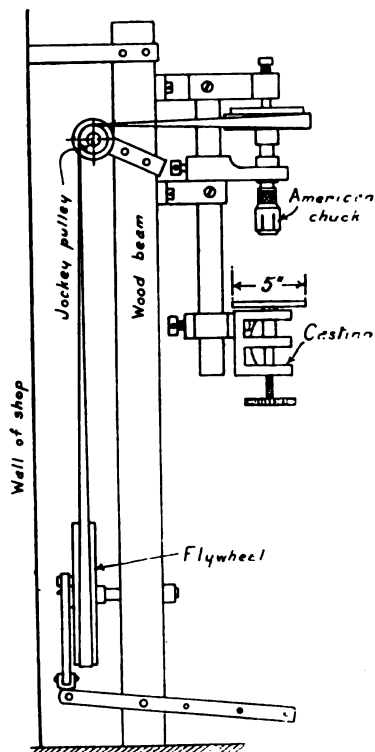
SHOWING ARRANGEMENT OF A SIMPLE DRILLING MACHINE.
